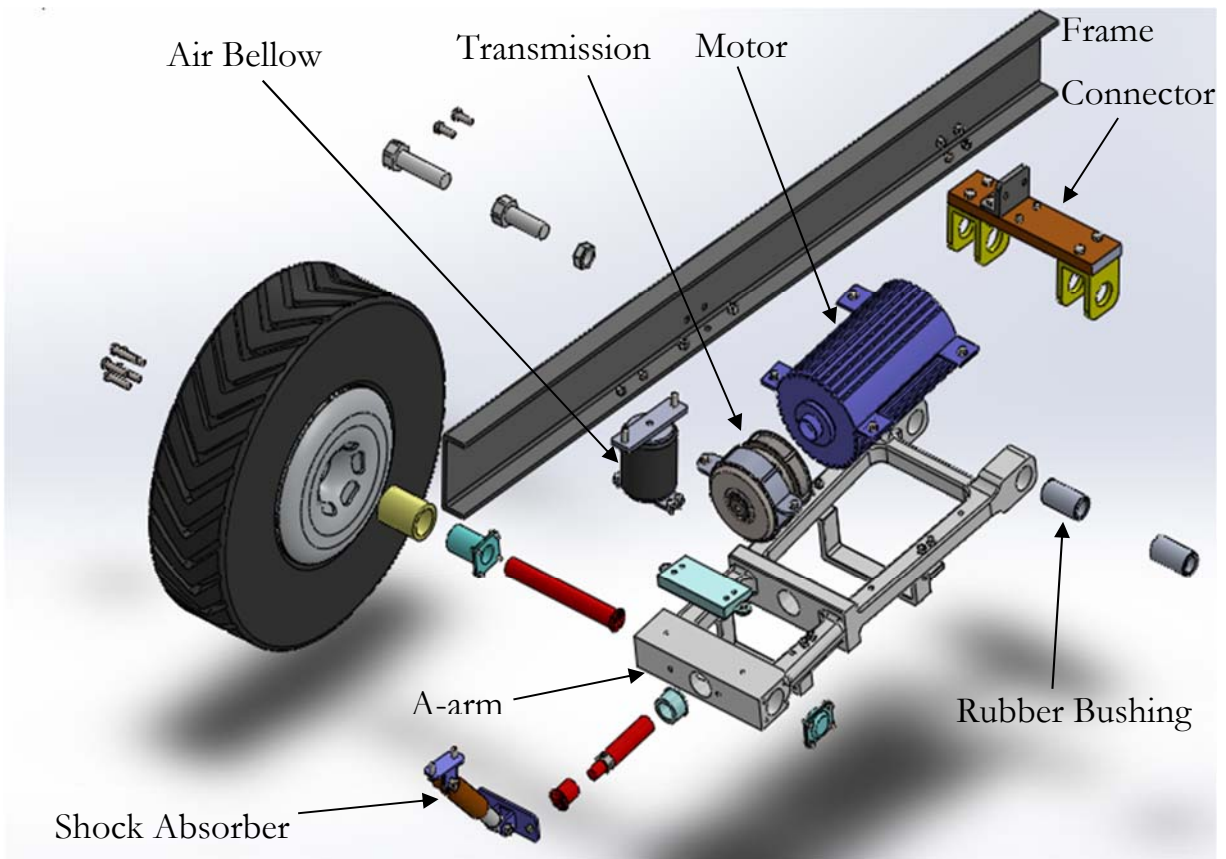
EXPLODED VIEW OF SYSTEM
